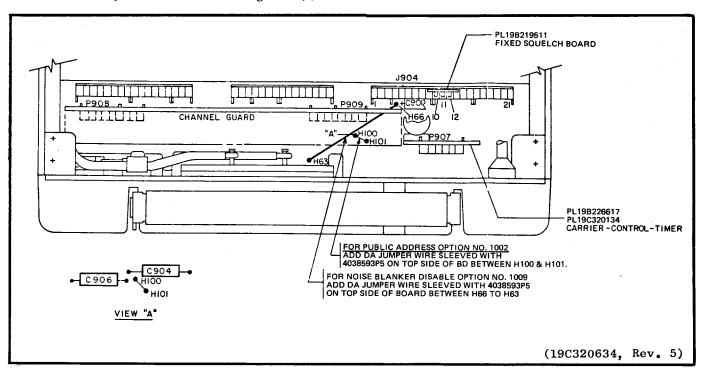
Blanker Disable and Fixed Squelch Modifications
